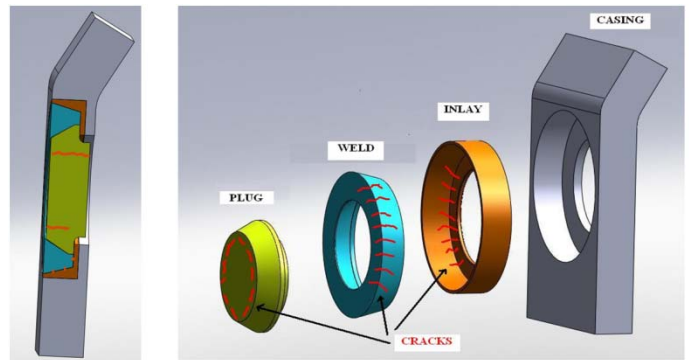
CROSS SECTIONAL VIEW (L) AND EXPLODED VIEW (R) OF THE TURBINE CASING / PLUG MODEL
